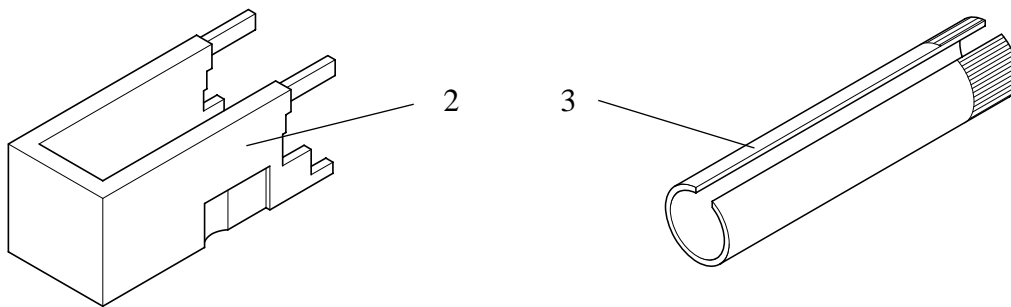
Dismounting Tool (2) and Assembly Key (3)
